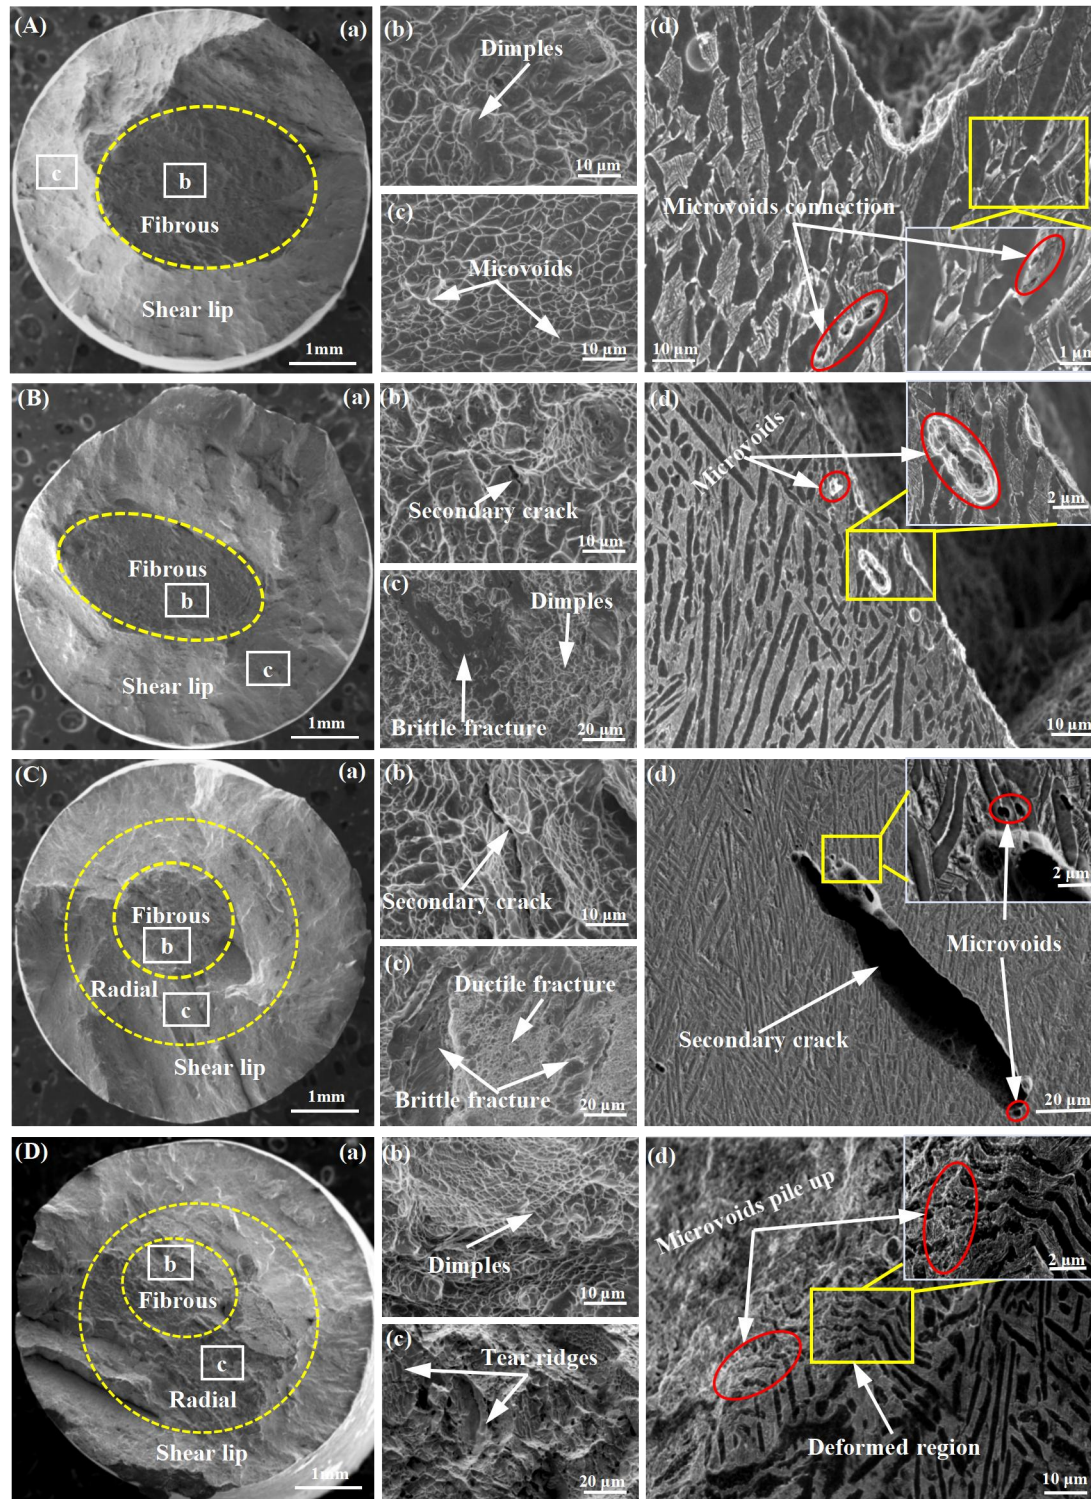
Tensile fracture surfaces of TC21 forgings at different forging conditions: (A-D) specimens A-D; (a) low magnification of fracture, (b-c) micro image of fracture morphology; (d) micro image of fracture profiles.
